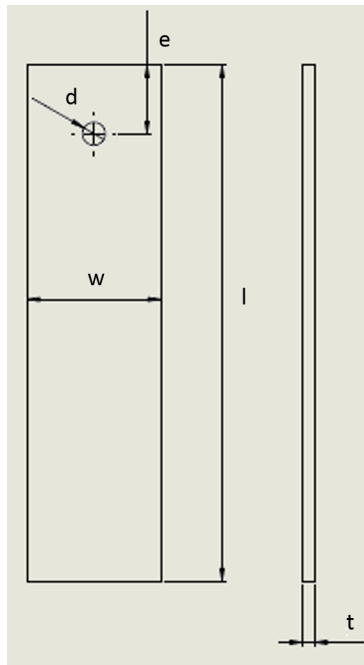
Simplified representation of the typical geometry of a bearing specimen and its basic dimensions [6].
